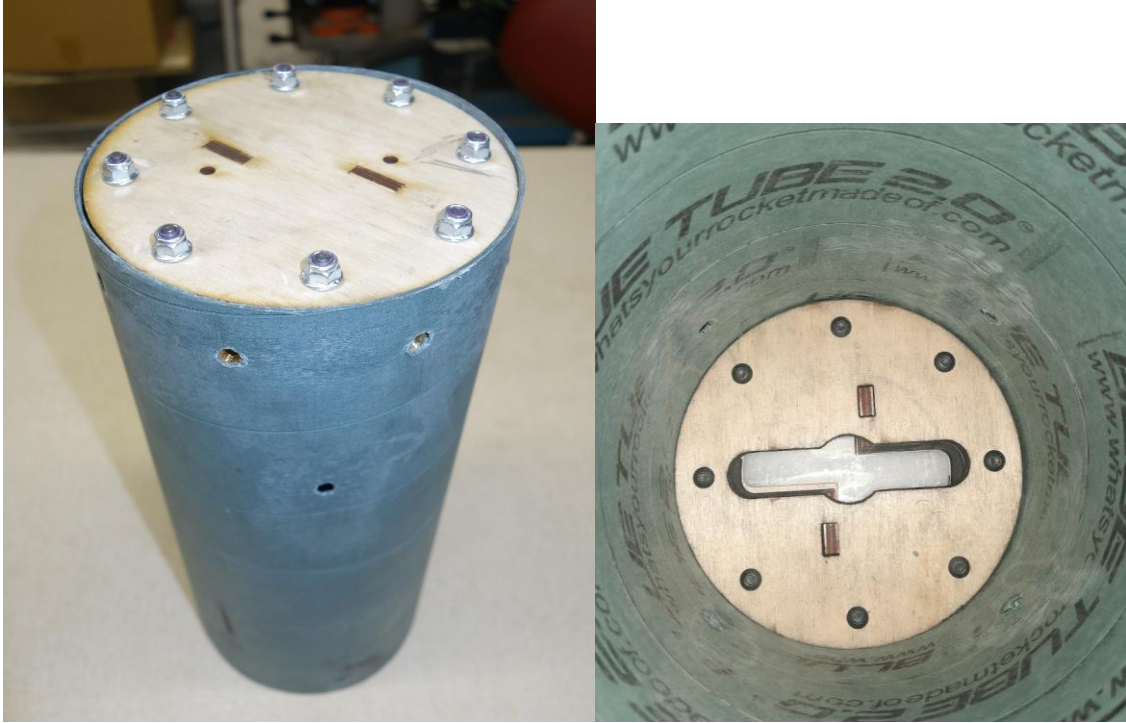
Left: Aft bulkhead at the base of the coupler tube, with brass threaded inserts. Right: Aft bulkhead viewed from above while installed, showing spine slot and Delrin skid plate.
